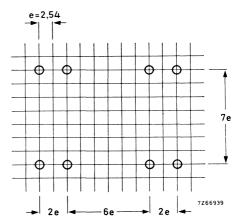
Hole pattern for mounting on a printed-wiring board. Hole diameter 1.3 + 0,1 mm.
